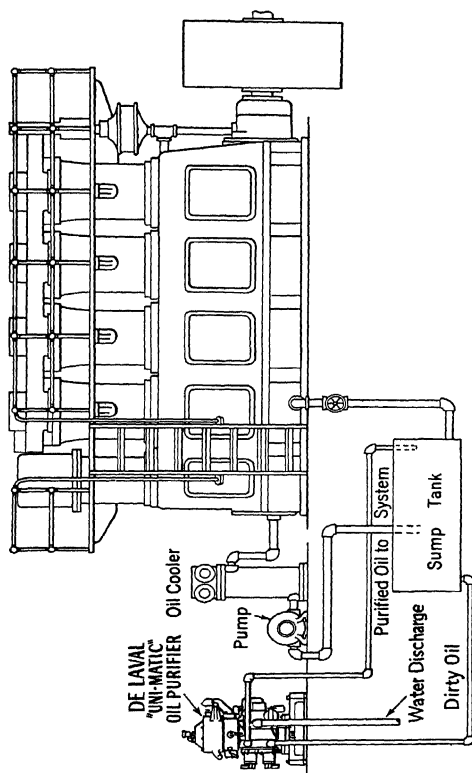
Continuous by-pass method of lubricating-oil purification on a pressure-lubricated engine. (Courtesy of De Laval Separator Company.)
